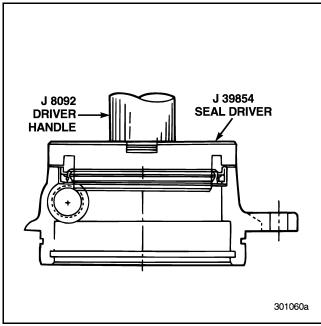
Rear Mainshaft Bearing Cover Oil Seal Tools
